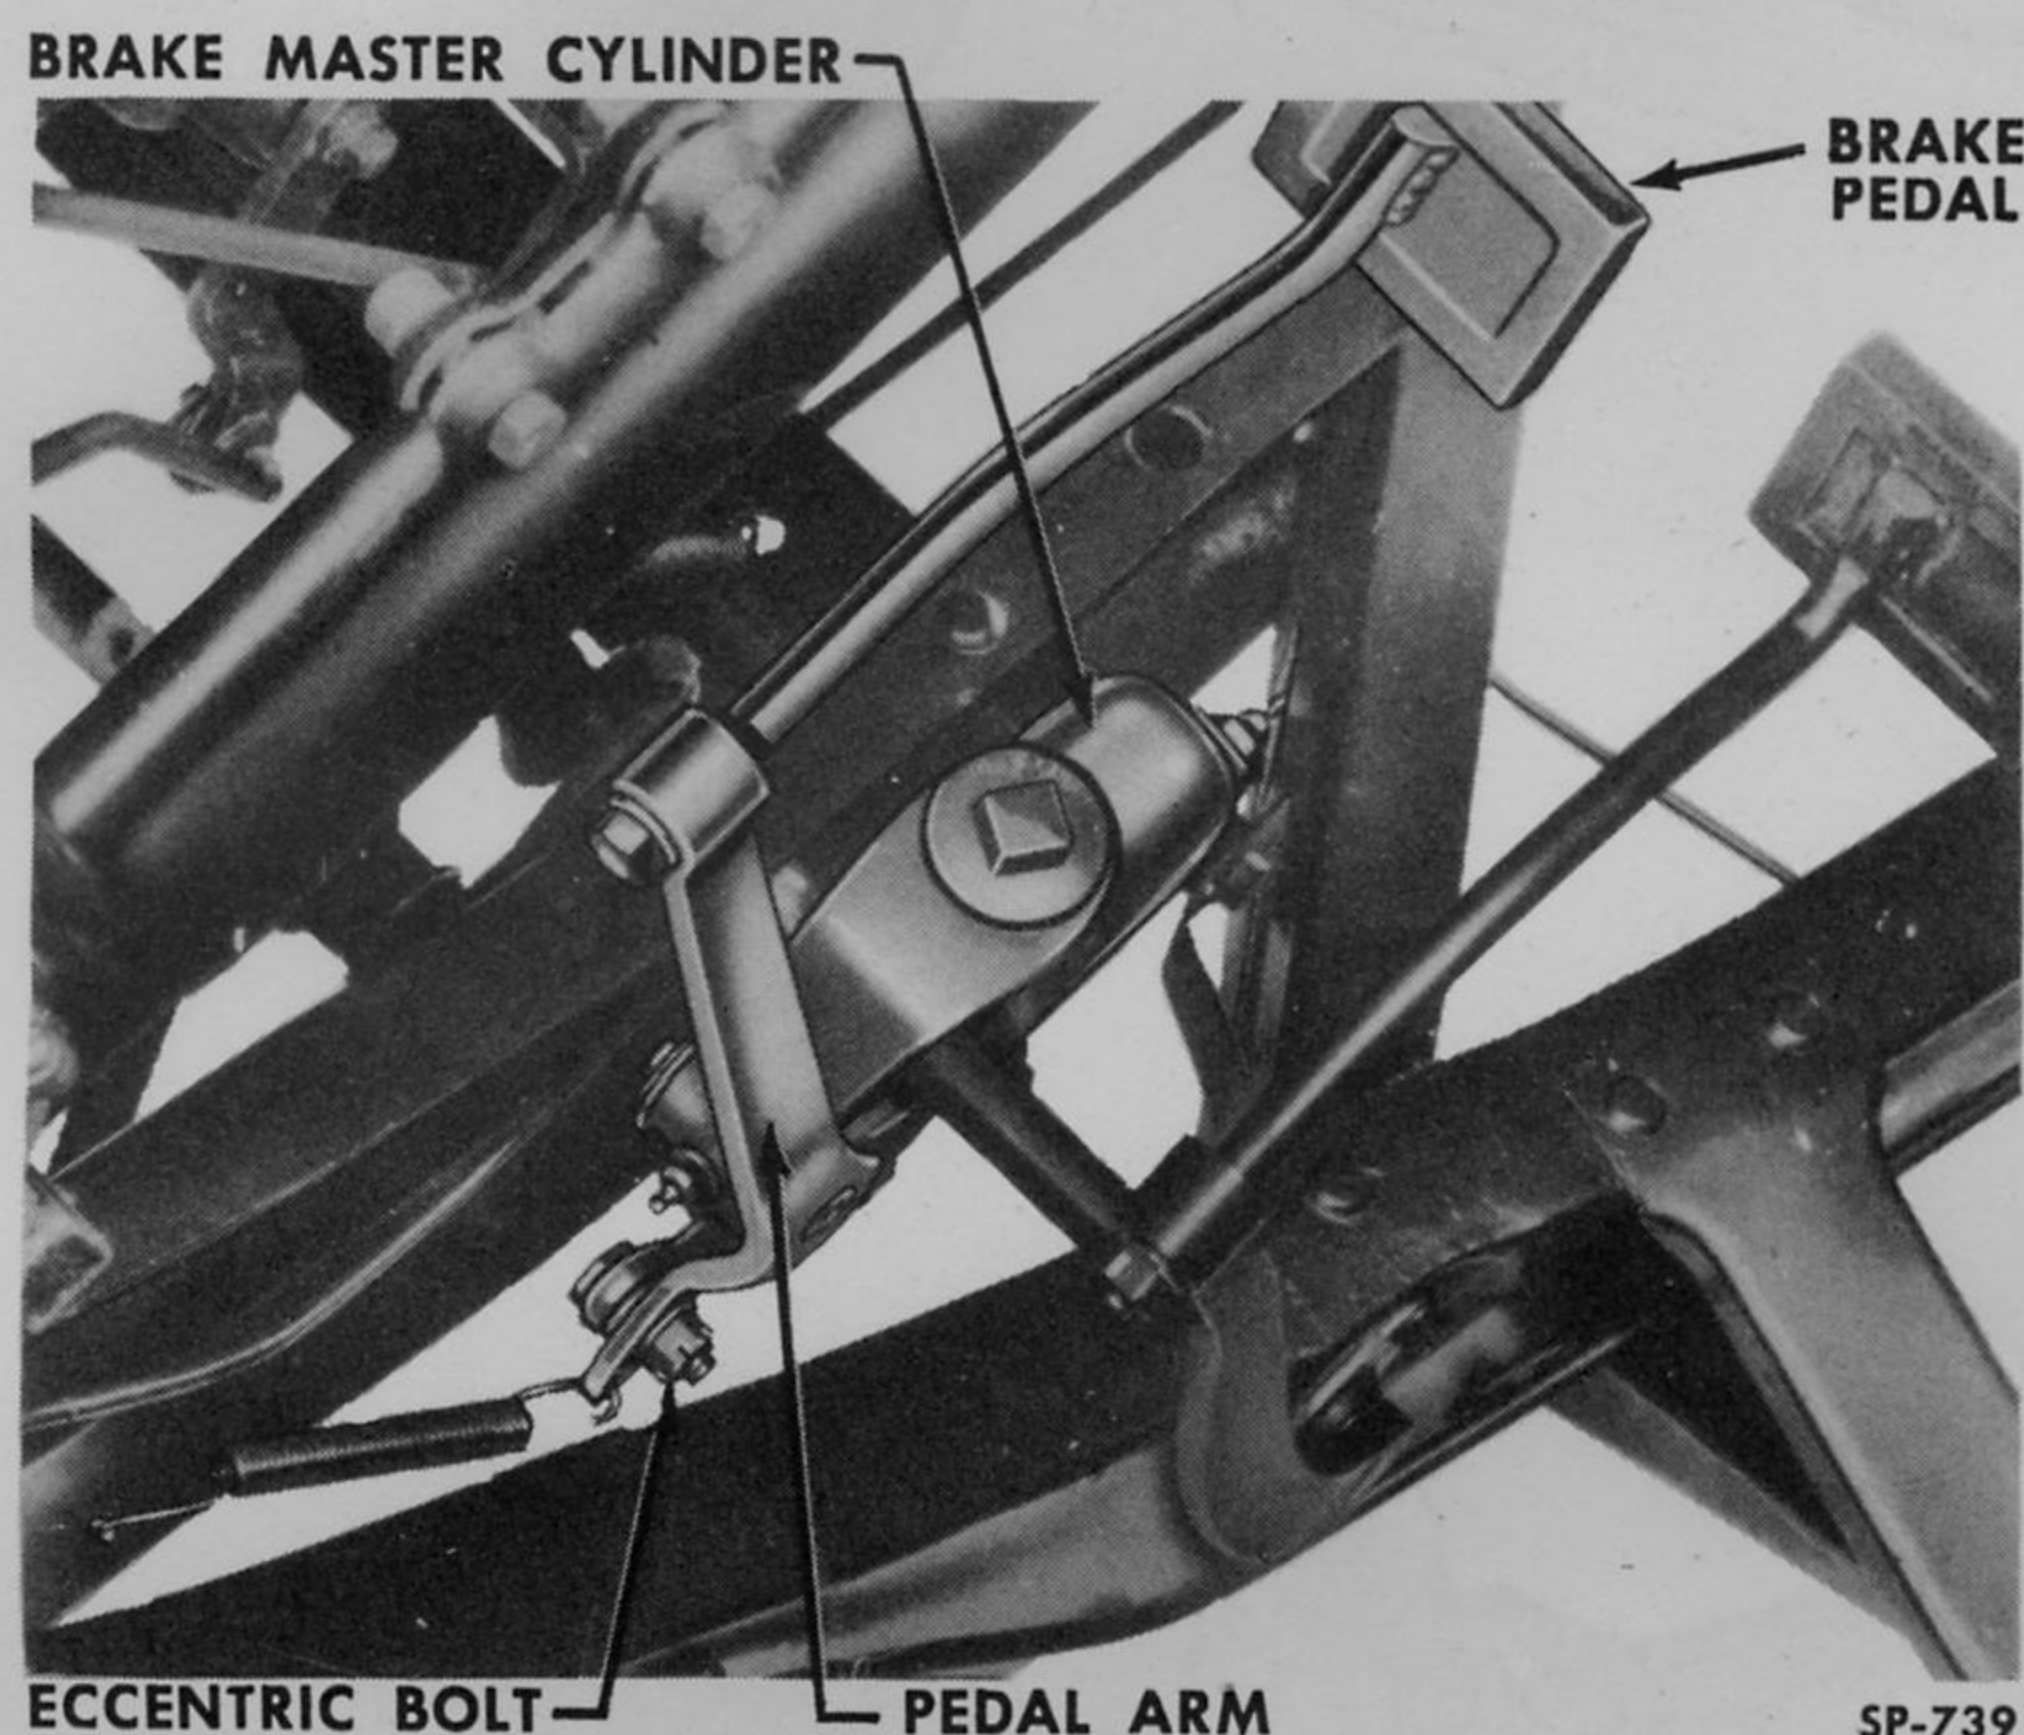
Brake Pedal and Master Cylinder Mounting—Kaiser
